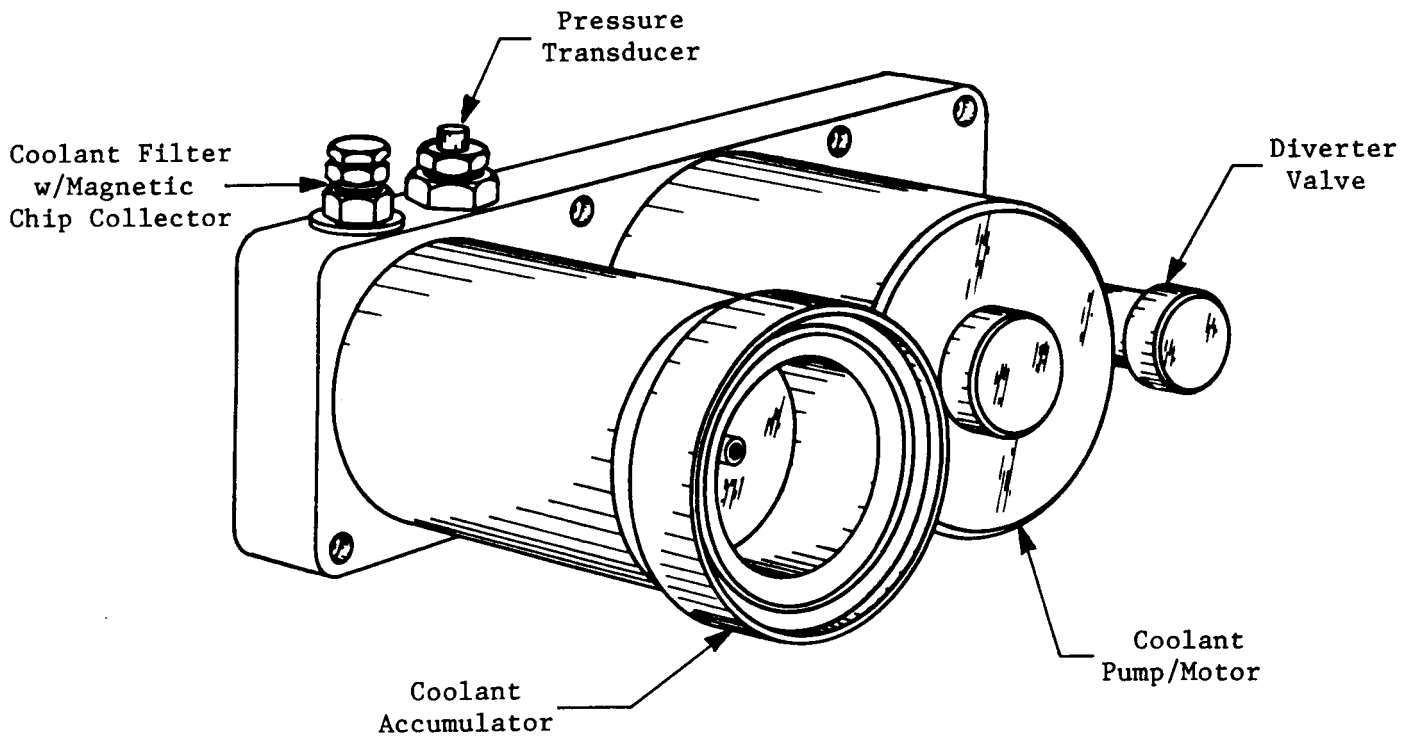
THERMAL CONTROL ASSEMBLY FOR RFCS-SSP, ISOMETRIC VIEW
